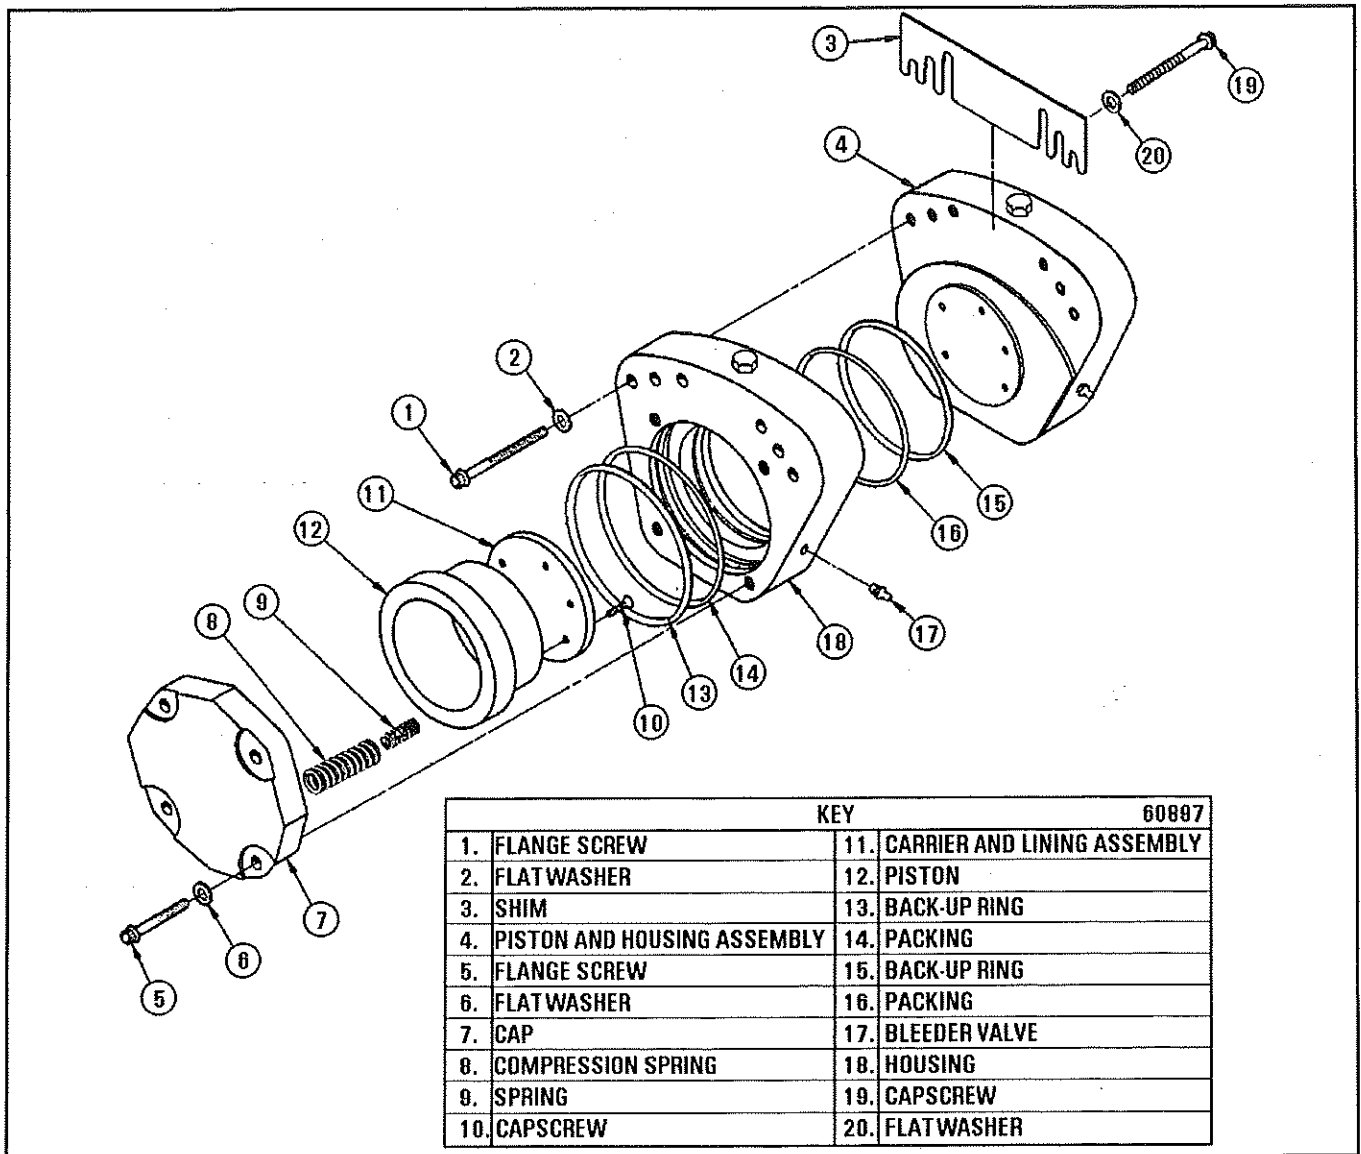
PARK BRAKE CALIPER ASSEMBLY (60897)
